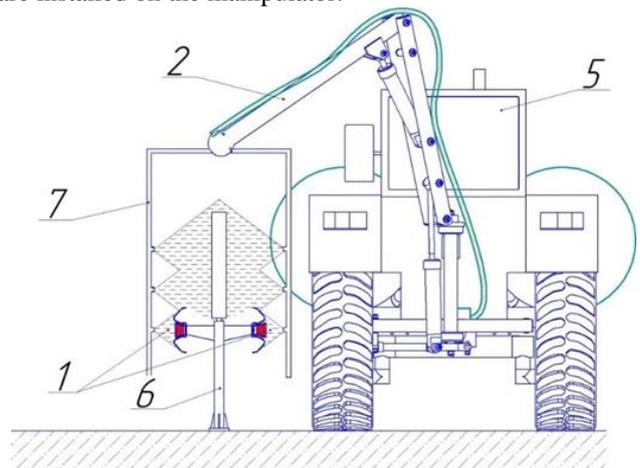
Schematic view of contactless guardrail washing machine (rear view).
